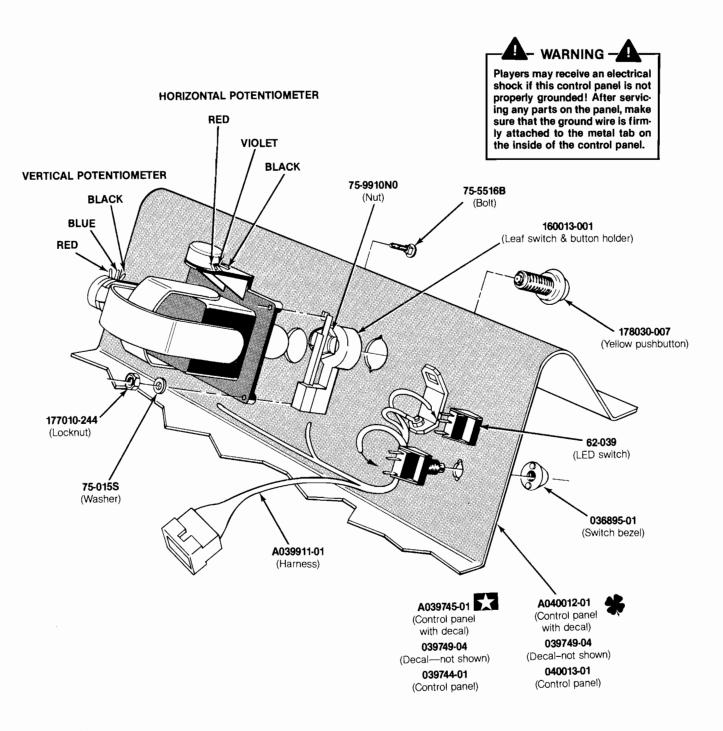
Control Panel Assembly US-Built Game A039746-01 A Ireland-Built Game A040011-01 A .
